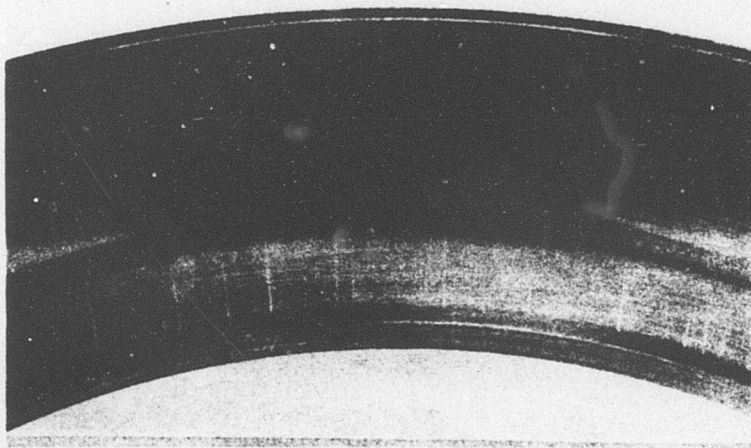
View of Cup Race Surface - Bearing S/N 73-73.
